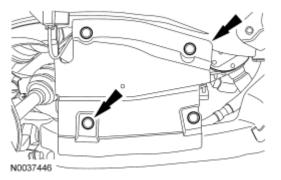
Locating Splash Shield Pin-Type Retainers Courtesy of FORD MOTOR CO.
